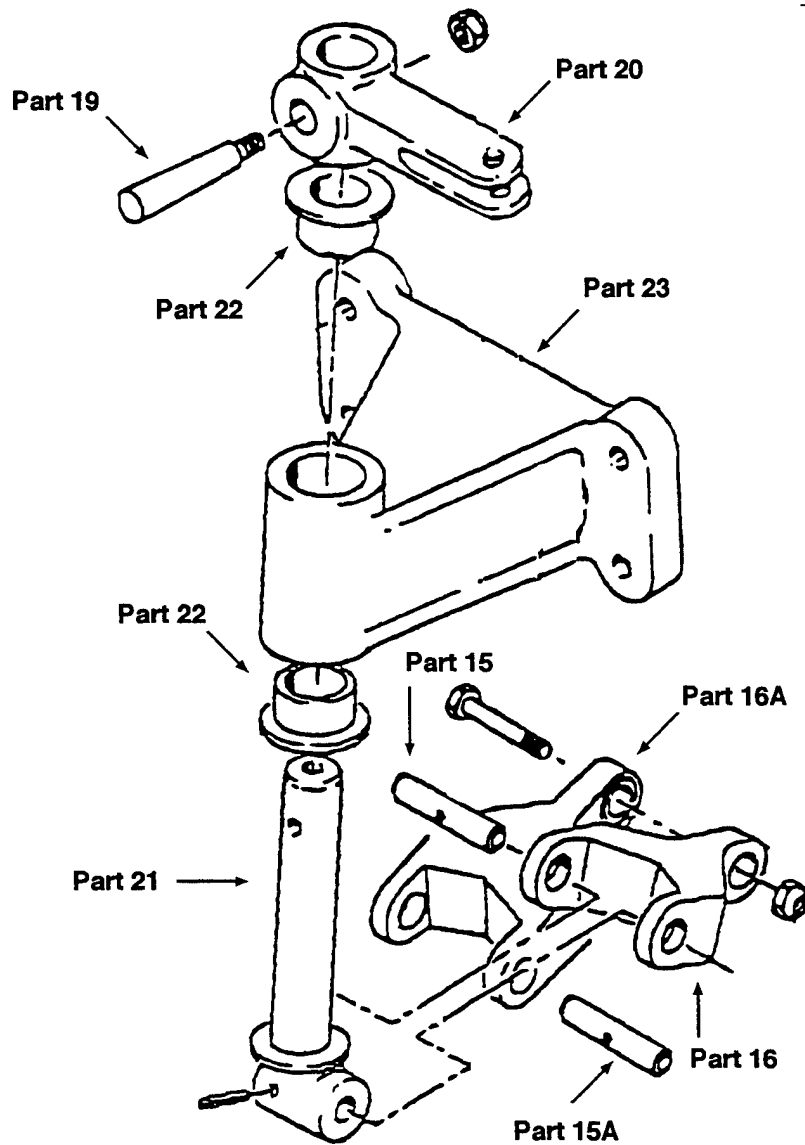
F-5 Aircraft Nosewheel Steering Subassembly
